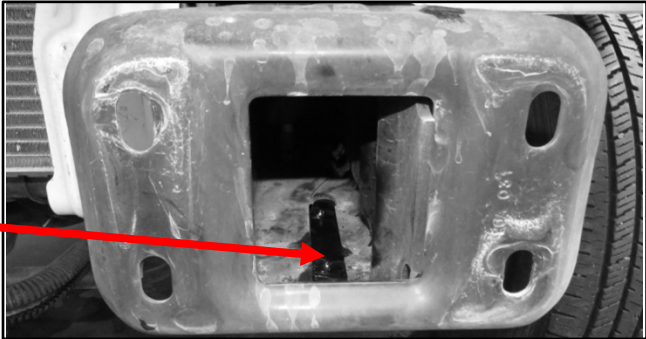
Drill holes to enlarge them to about 10mm diameter
